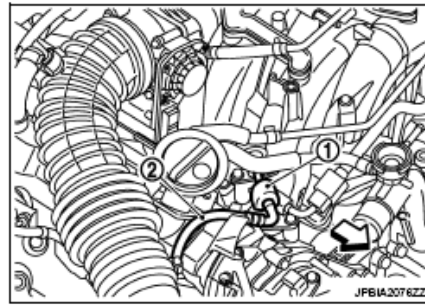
Identifying Quick Connector Cap And Fuel Feed Hose
